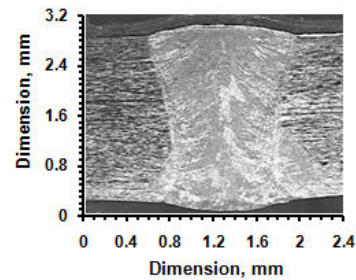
Weld bead profile for beam power of 1800 W, welding speed of 400 mm/min and beam angle of 85° – Full Penetration
